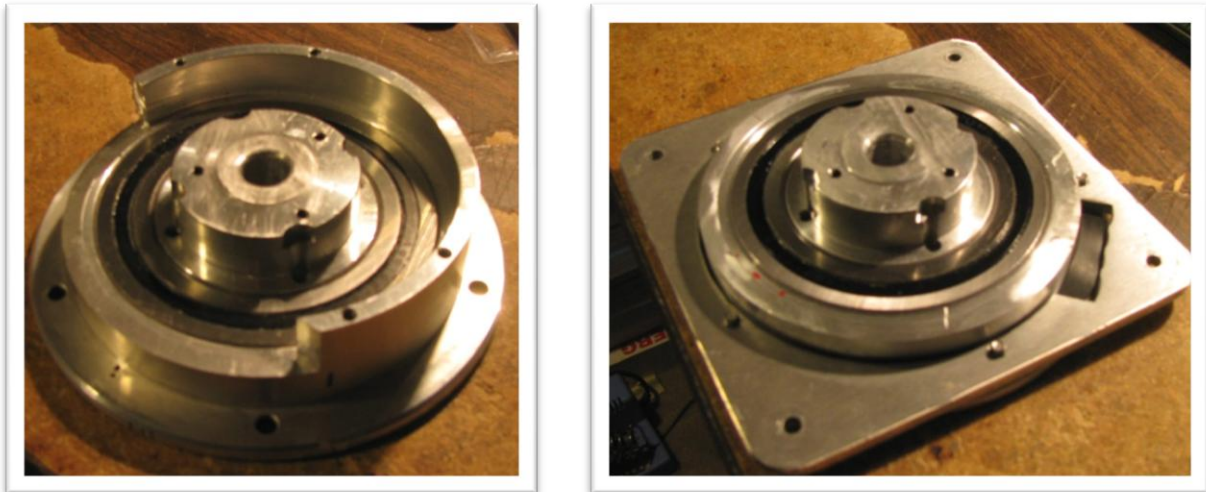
a & b: Satellite bearing lip, and bearing lip removed
